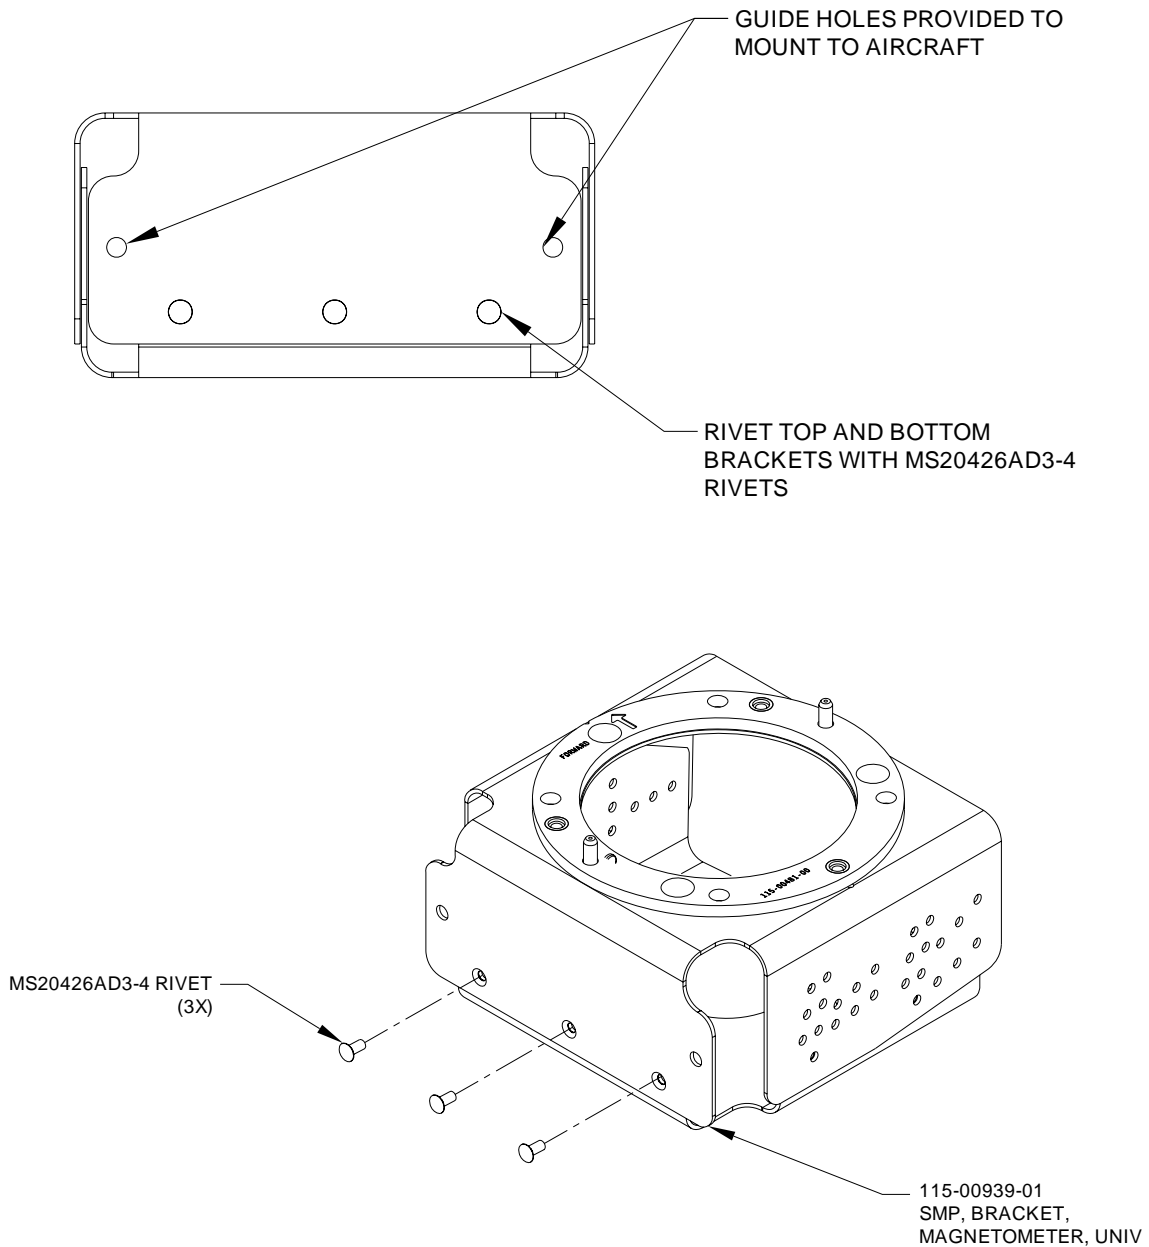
GMU 44 Universal Mount Top and Bottom Bracket Assembly
